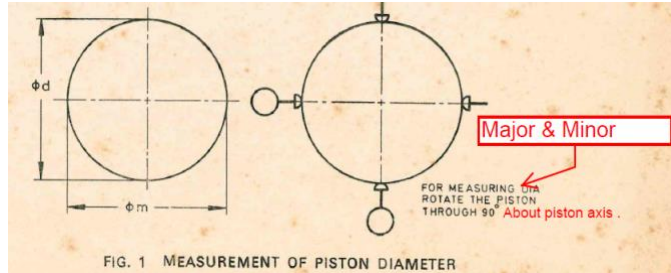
MEASUREMENT OF PISTON DIAMETER
